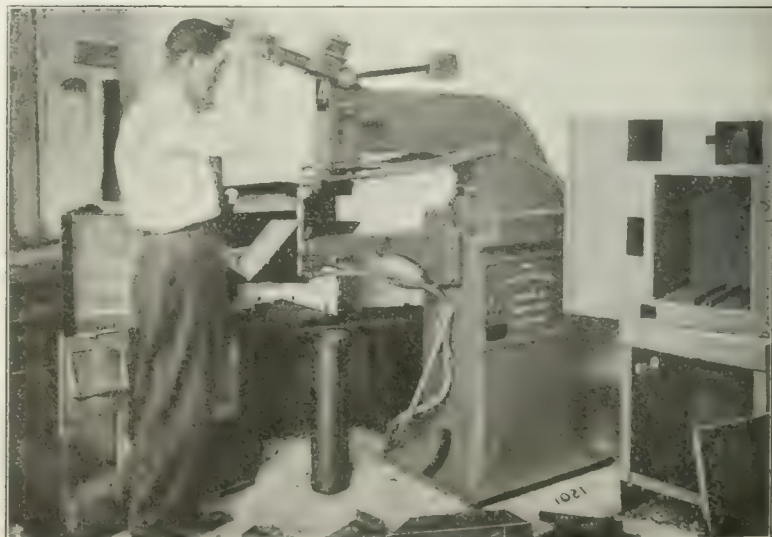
Welding Machine for Stove and Sheet Metal Work.
